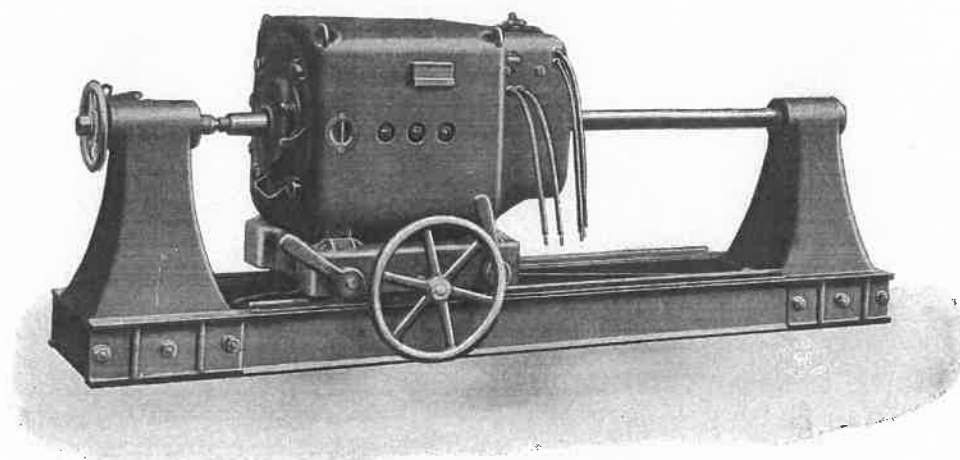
A special machine for removing armatures from Box Frame Motors. Motor in place
